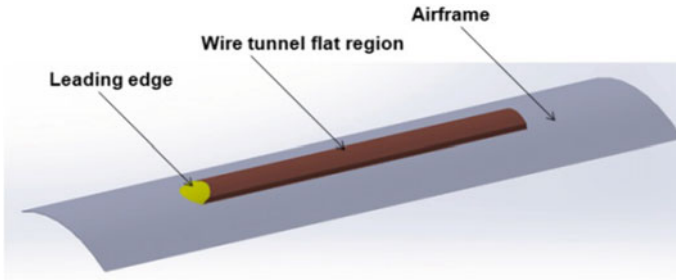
Front segment of the wire tunnel assembly mounted on airframe
